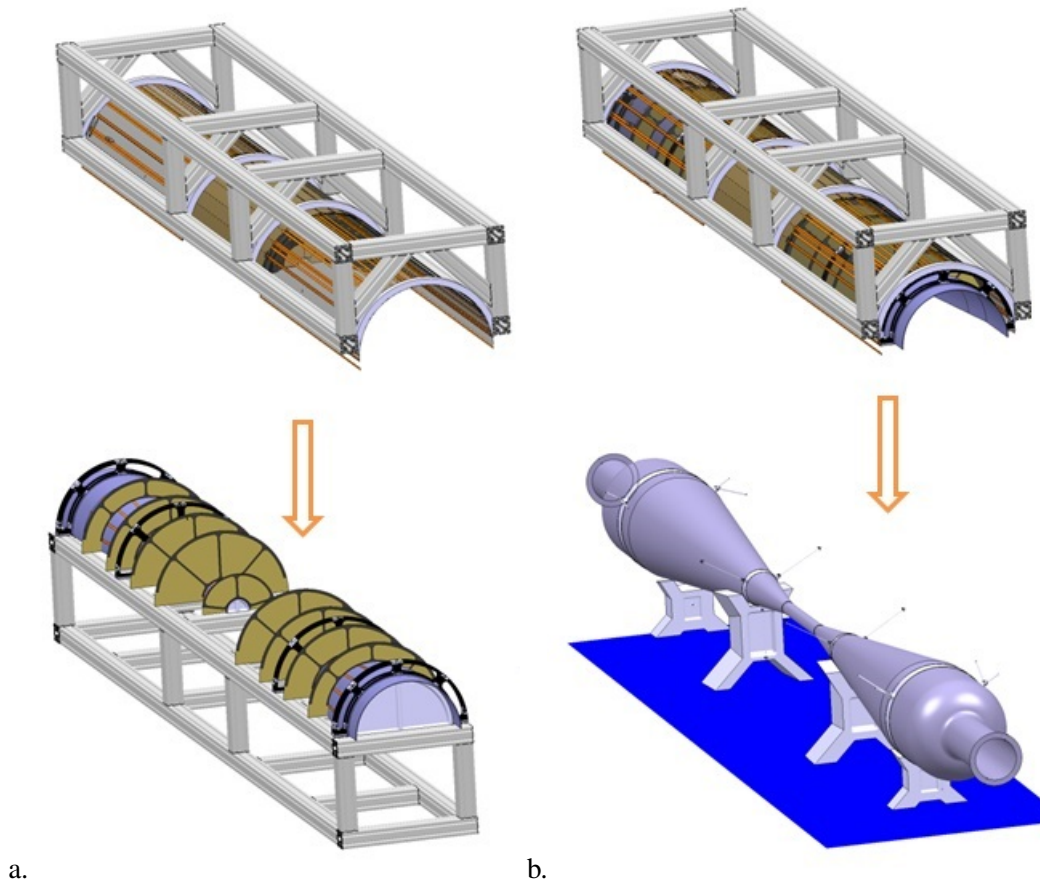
Final assembly part 1: a) one of the sub-assemblies of the vertex detector and inner tracking layers is lowered onto, and connected to, a sub-assembly of the FTD and Conical Shields; b) this assembly is then lowered onto the beam pipe and its upper support spokes are connected to the Main Support Cylinder.
